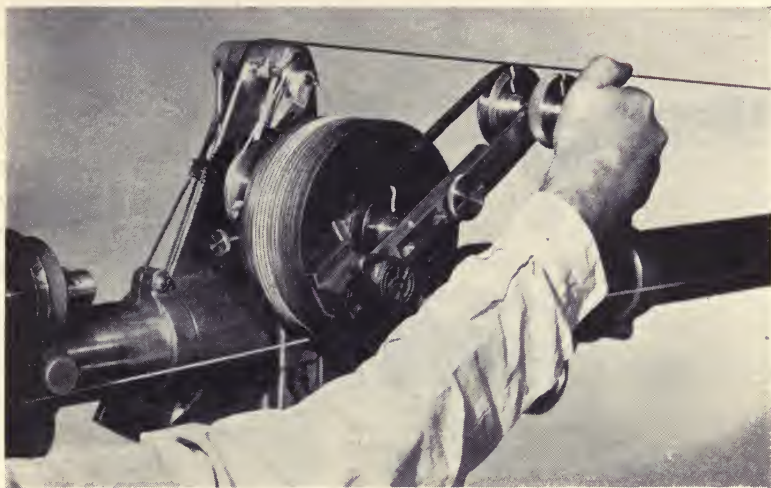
Close-up of operator's hand. Crank at 2 o'clock.
